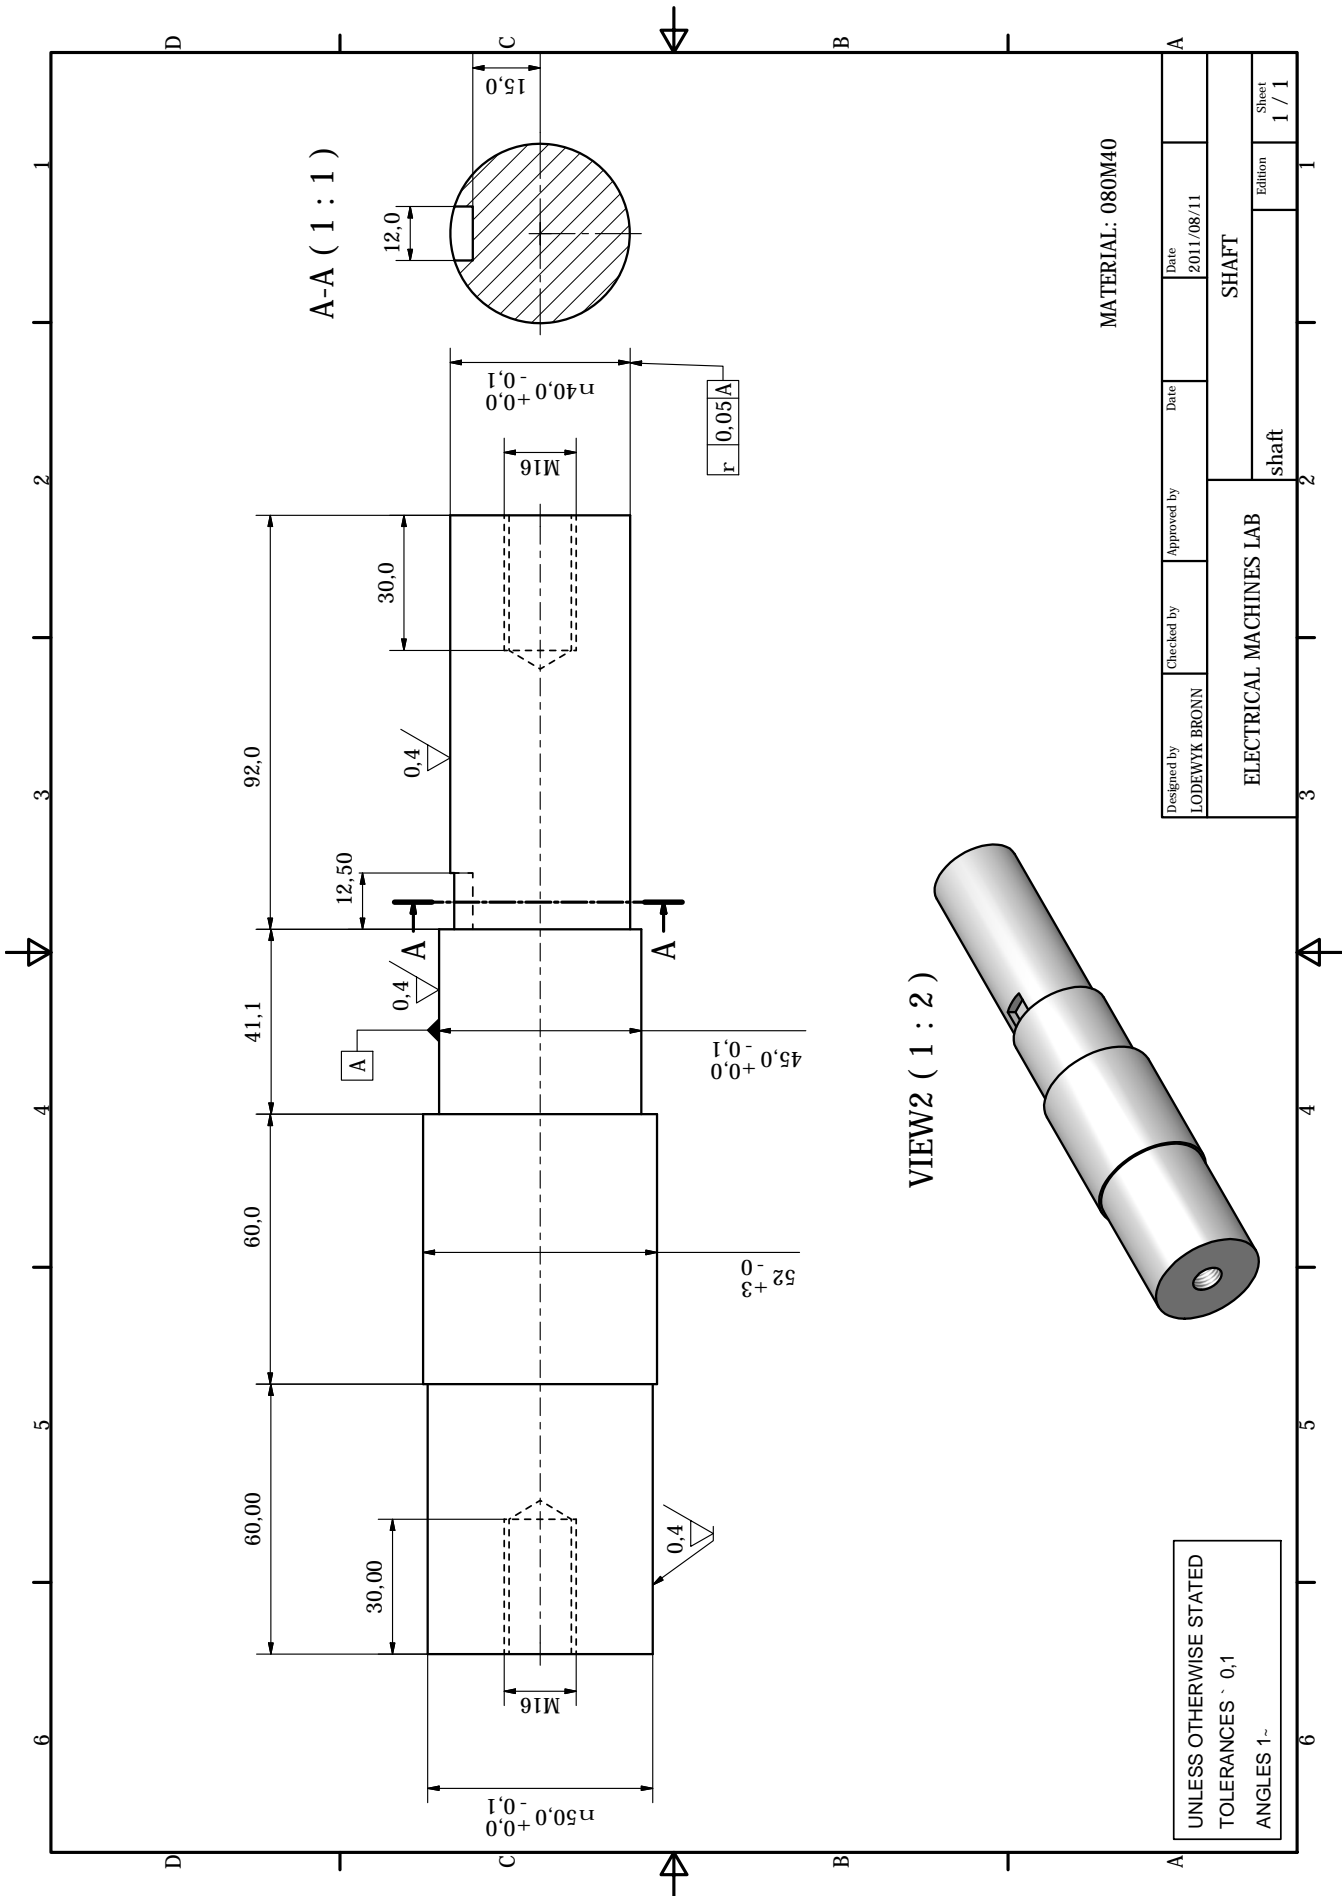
Modified Shaft for new Tapered Roller Bearing
